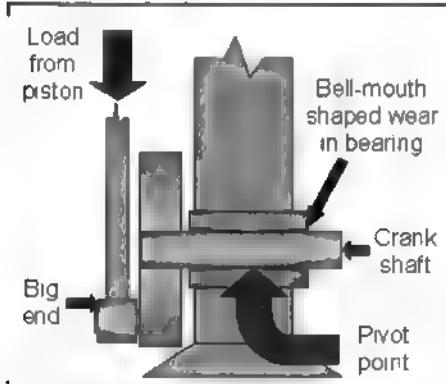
The cantilevered load on the crankshaft from the big end causes uneven wear on the main bearing.
